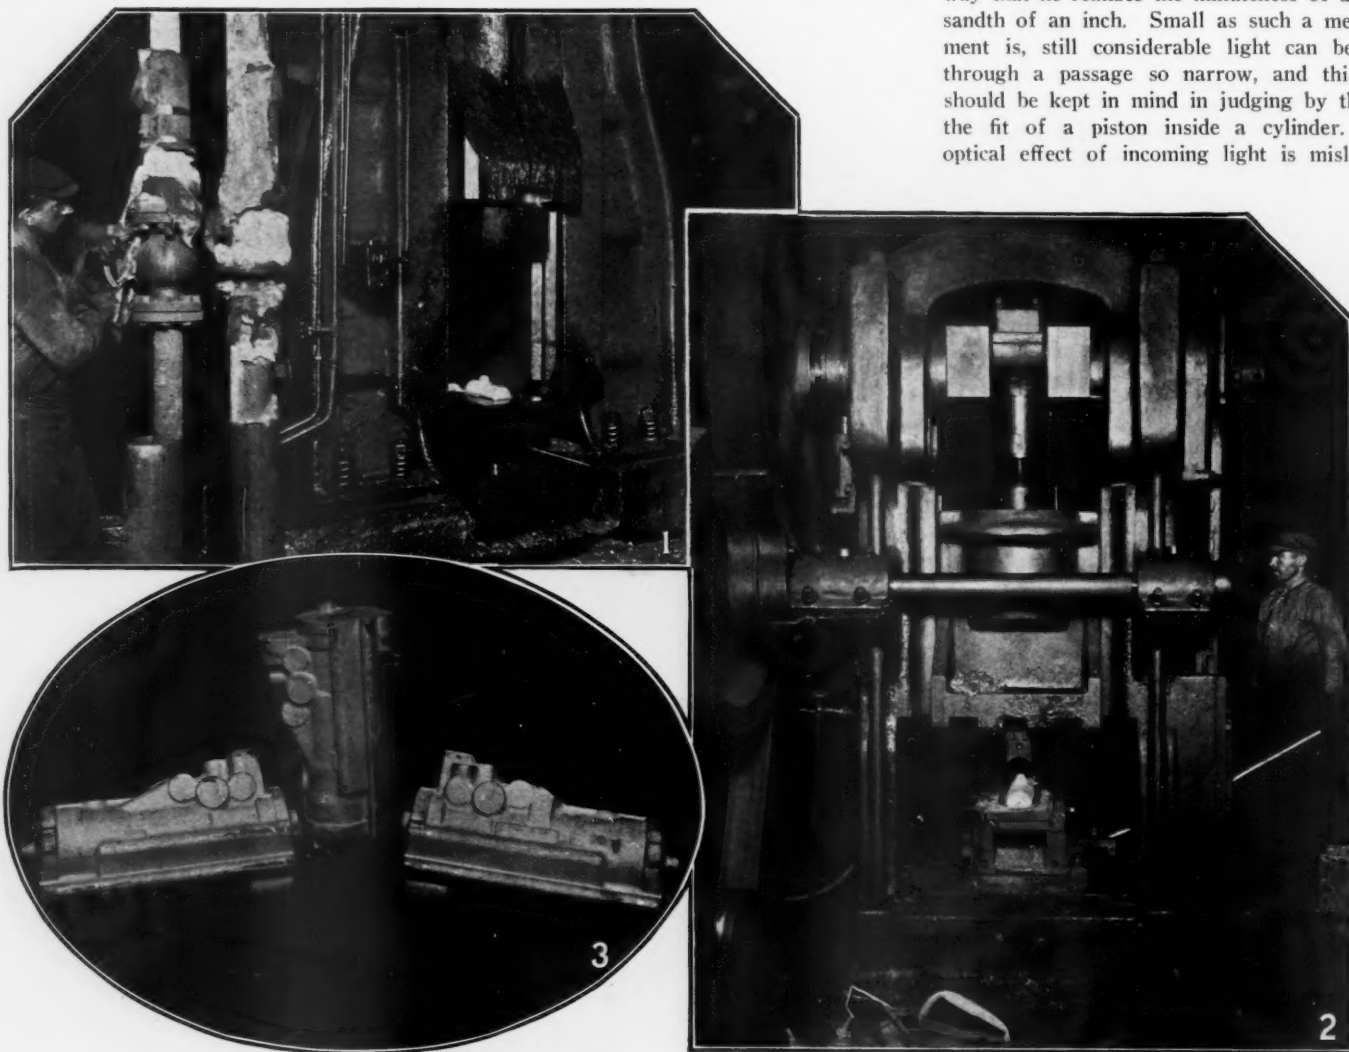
Forging frontheads for drifters with an 8,000-pound steam hammer equipped with suitable massive dies of alloy steel. These dies are expensive affairs. Fig. 2—Powerful press cutting the "flash" or excess metal from a fronthead forging after it has been formed under the hammer. Fig. 3—Cylinder forgings for "Leyner-Ingersoll" drifters which have undergone sandblasting to remove surface scale.
